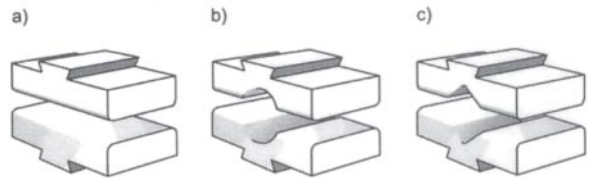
Open die forging tools: (a) flat dies; (b) U-shaped dies; and (c) V-shaped dies. (From Ref. 2.)
